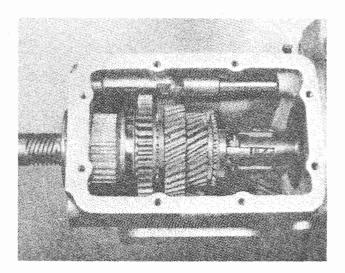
Showing the removal of the Mainshaft Circlip with Churchill Tool No. 20SM69.
